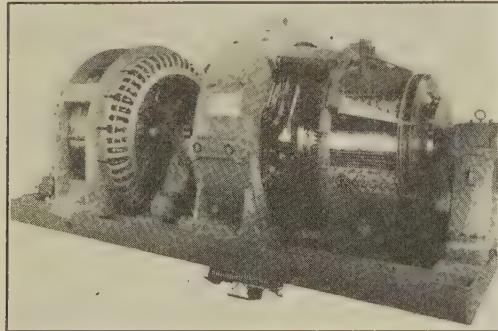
SHOWS A WELDED MOTOR-GENERATOR SET THE ONLY CASTINGS USED BEING THE PEDESTAL BEARINGS. EVEN THE BRUSH RIGGING FOR THE GENERATOR IS OF WELDED STEEL CONSTRUCTION. THIS SET IS RATED AT 750 KW., 900 REV. PER MIN.
